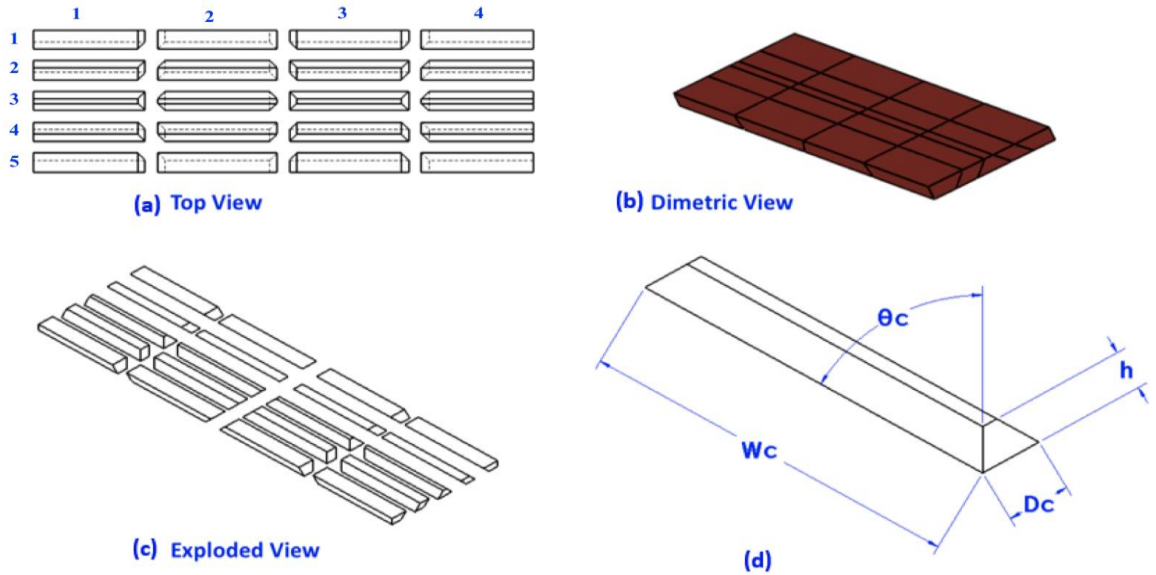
(a) Top exploded view of a part showing individual chunks (both rows and columns are numbered). (b) Dimetric view of the part showing chunk's boundary. (c) Dimetric exploded view. (d) Dimension of a center chunk
